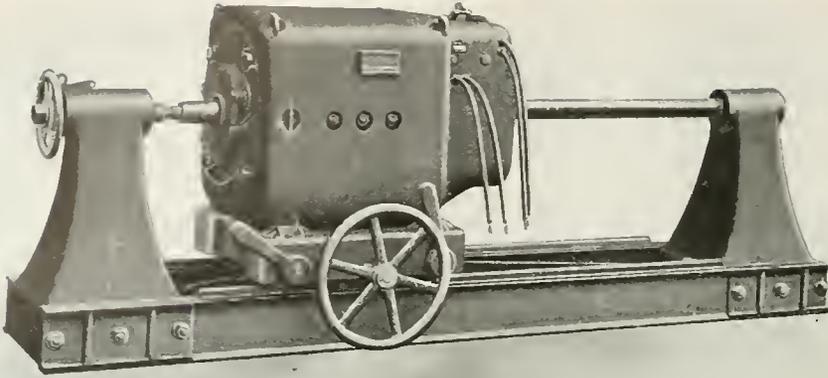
A special machine for removing armatures from Box Frame Motors. Motor in place
